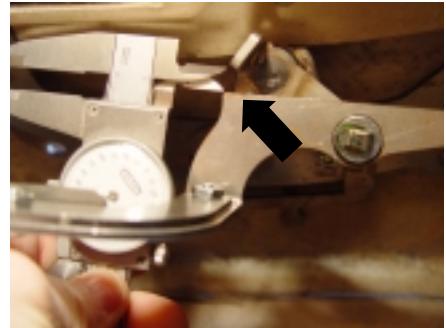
Place a thin washer and spring clip onto the exposed end of the upper brass pivot pin on the Drive Unit.
